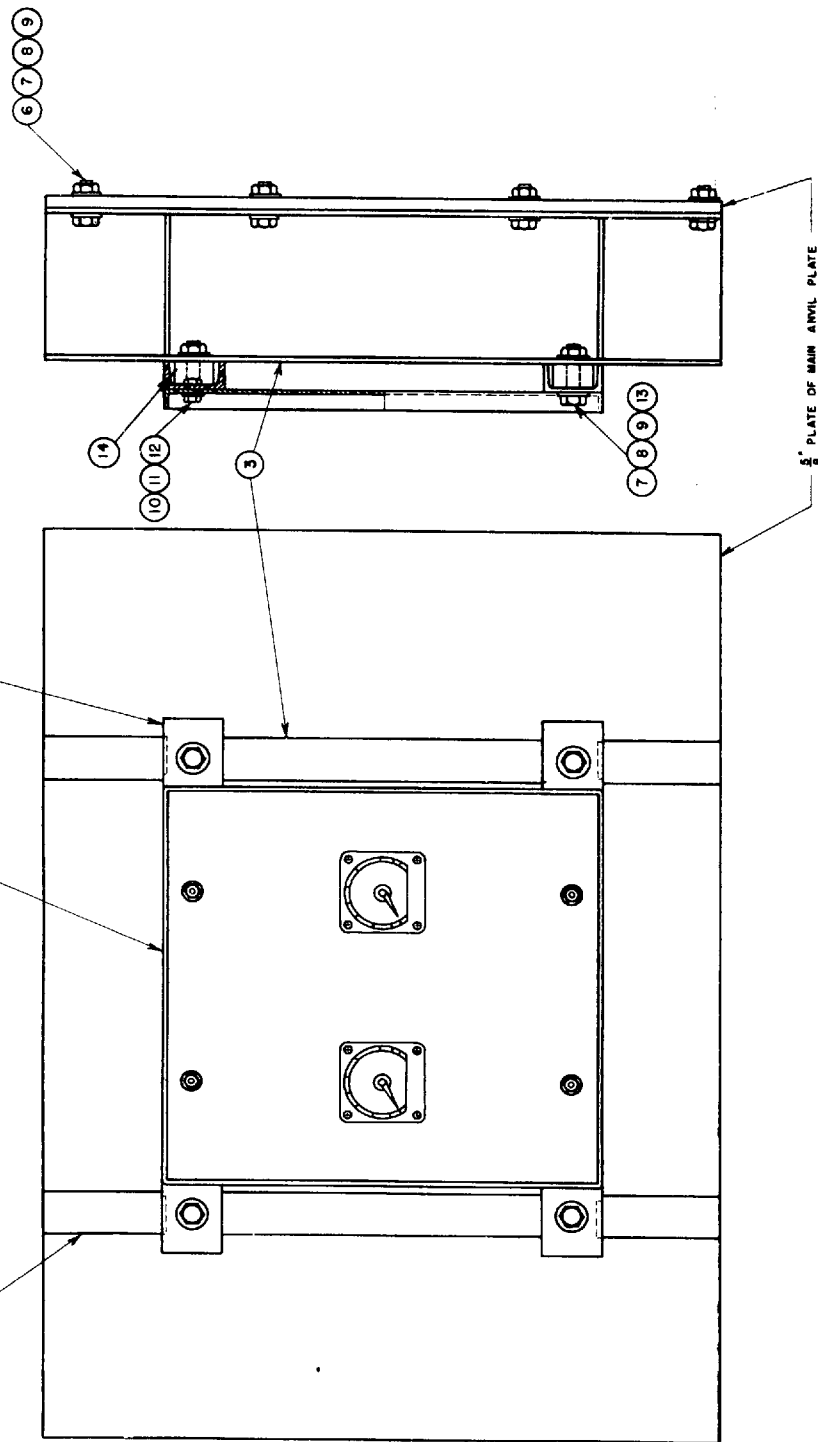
C.—Standard mounting for deck or platform mounted equipment: Type "A" test—Light-weight equipment.
